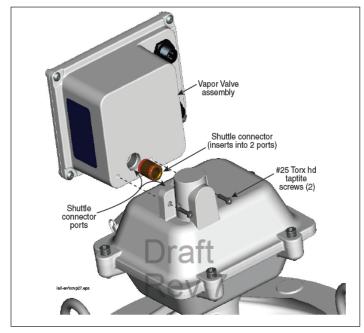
Replacing Vapor Valve assembly and Shuttle Connector
